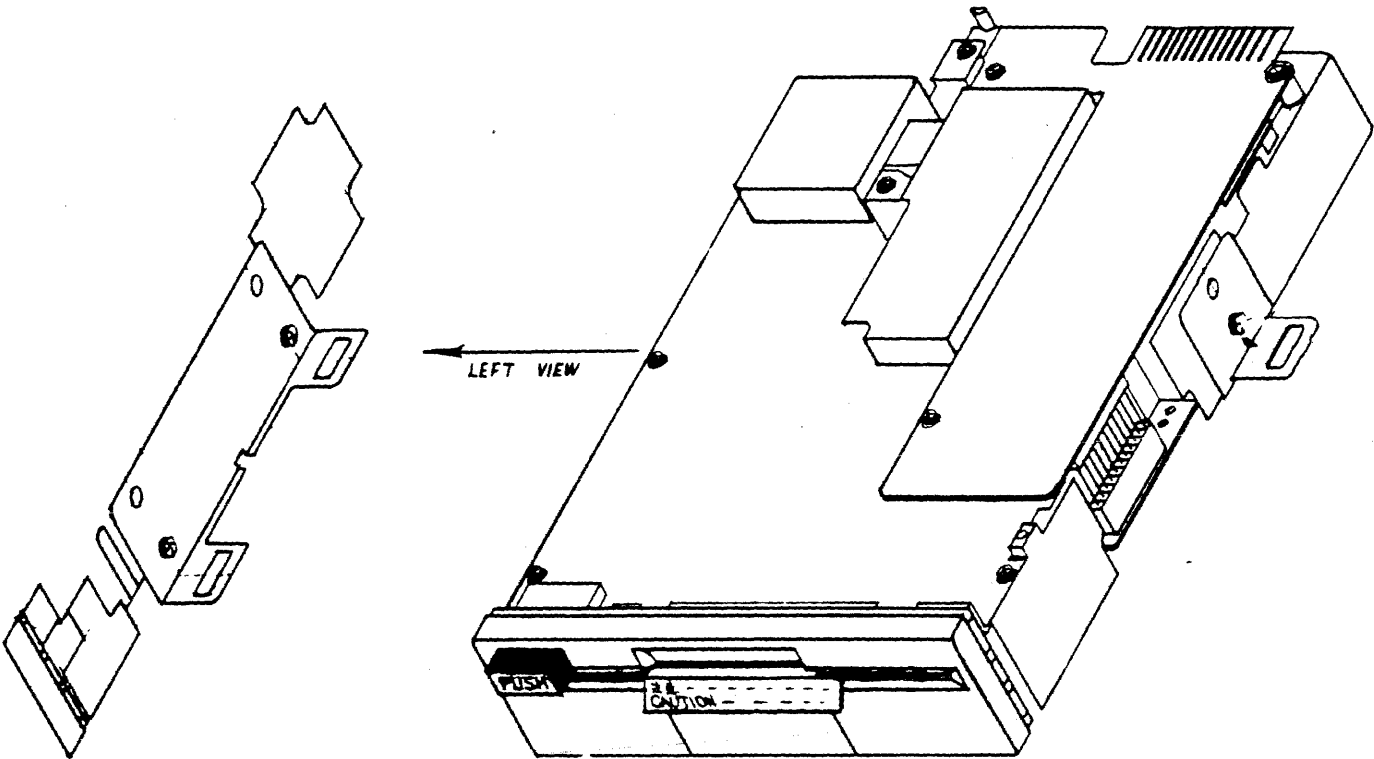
Hard Disk Drive Assembly 31-016-01
